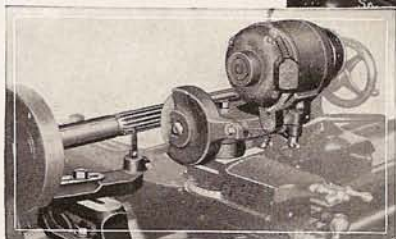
Sharpening a Straight Reamer in the 16-inch South Bend Lathe.
